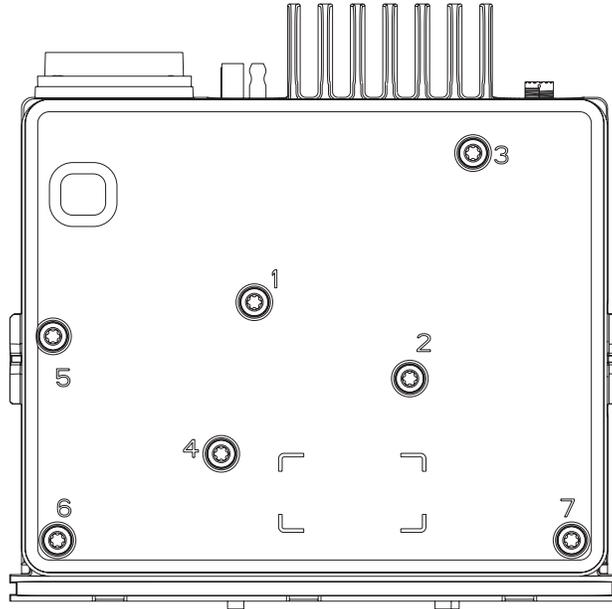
Screw Sequence to Tighten Die Cast Cover
